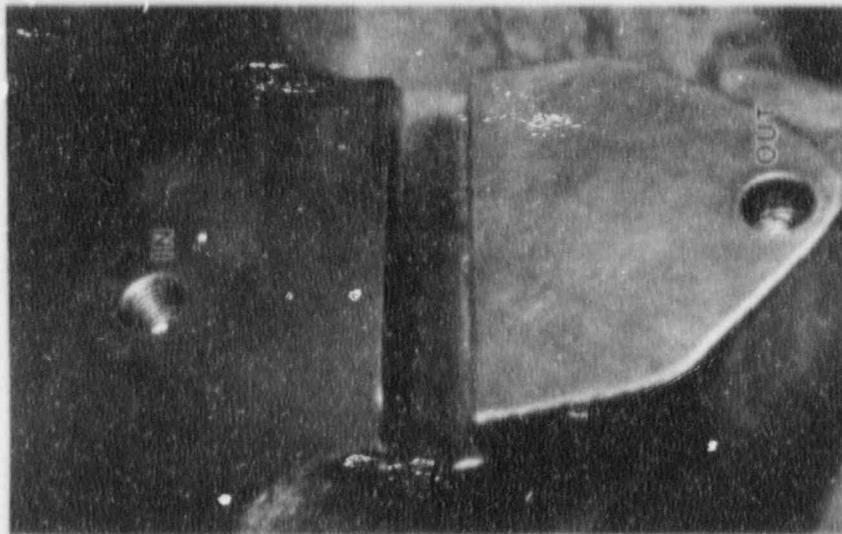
View of engine block left top deck at the location of camshaft bearing block number 3. Note, the threads of the inboard bolt hole are basically intact while approximately 5 threads of the outboard bolt hole are stripped. The inboard bolt was found to be the correct length while the outboard bolt was found to be short.
